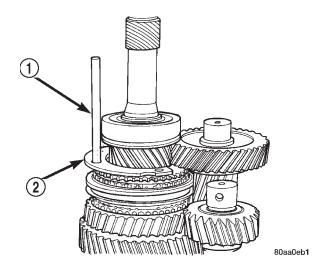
Positioning Output Shaft Bearing Retainer For Rear Housing Installation
